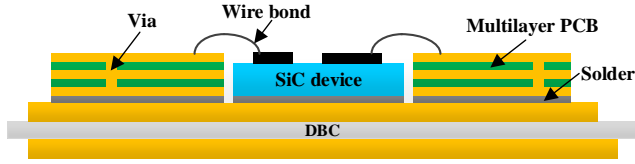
Cross-sectional view of DBC and PCB hybrid structure [47].
